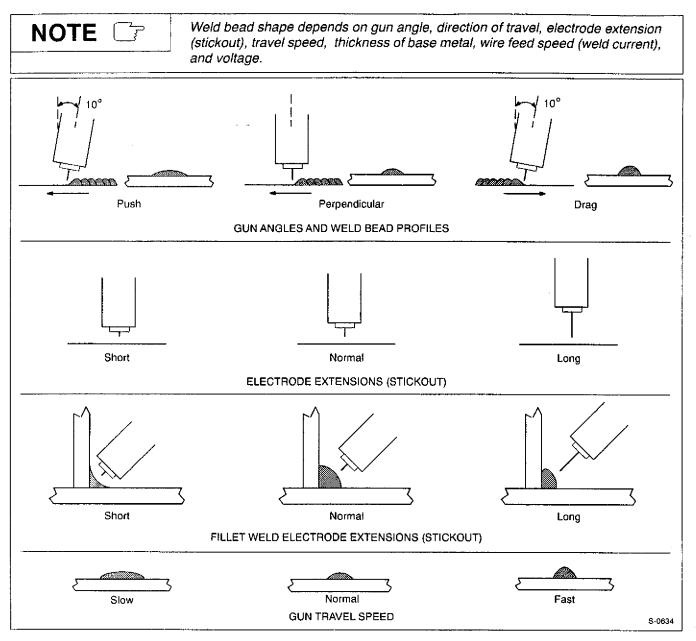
Conditions That Affect Weld Bead Shape
